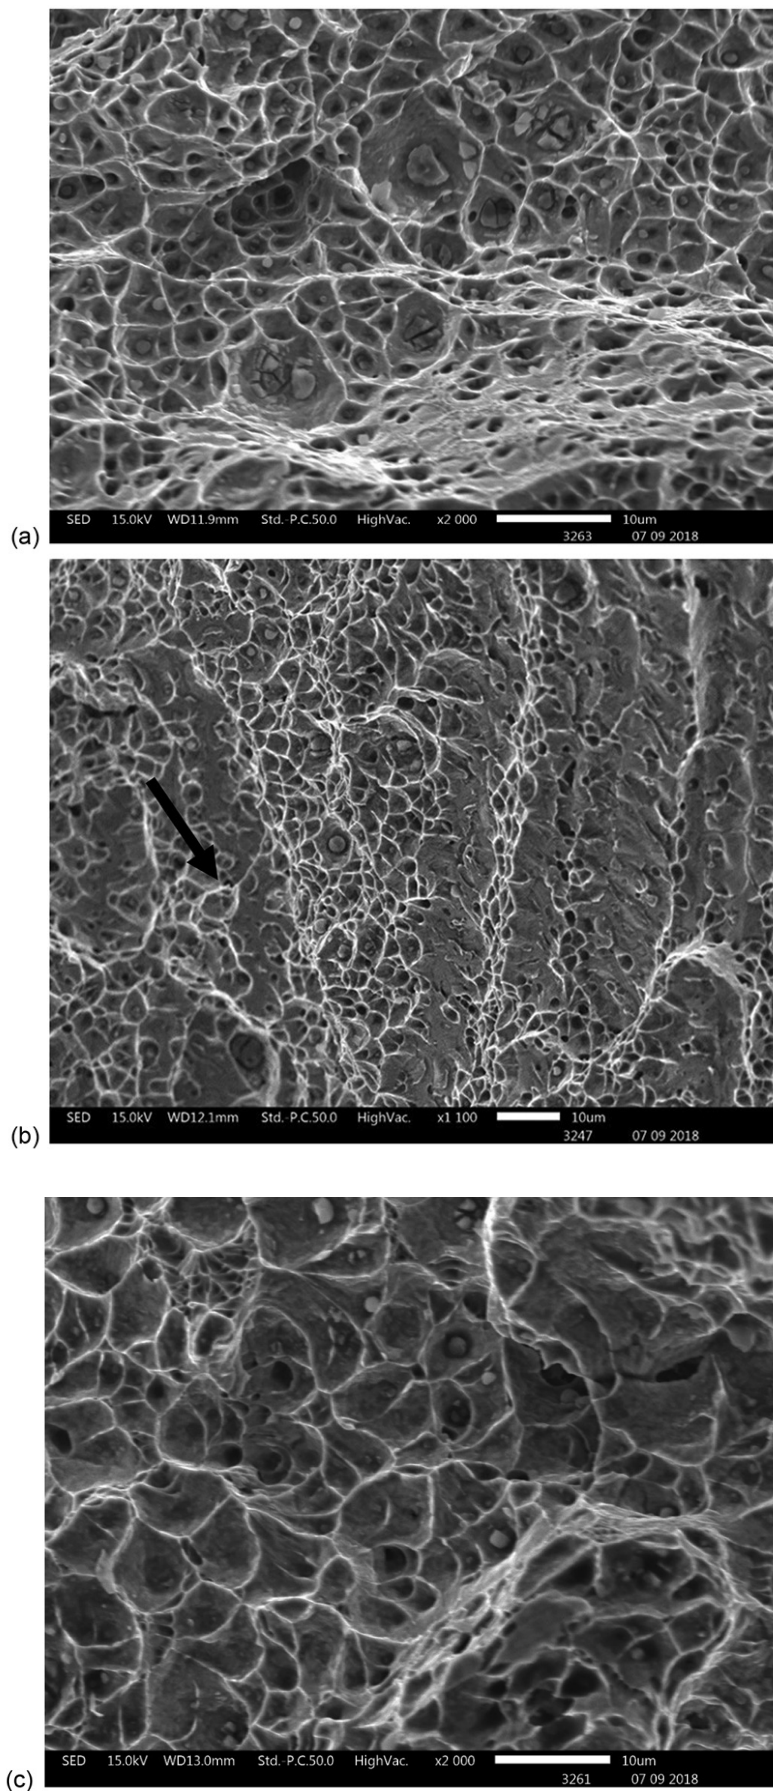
Fracture surfaces of weld metal Charpy impact specimens tested at  $-196^{\circ}\text{C}$ , showing fracture inclusions. (a) Electrode A (measured impact toughness: 32 J); (b) electrode B (measured impact toughness: 46 J); (c) electrode C (measured impact toughness 46 J)
